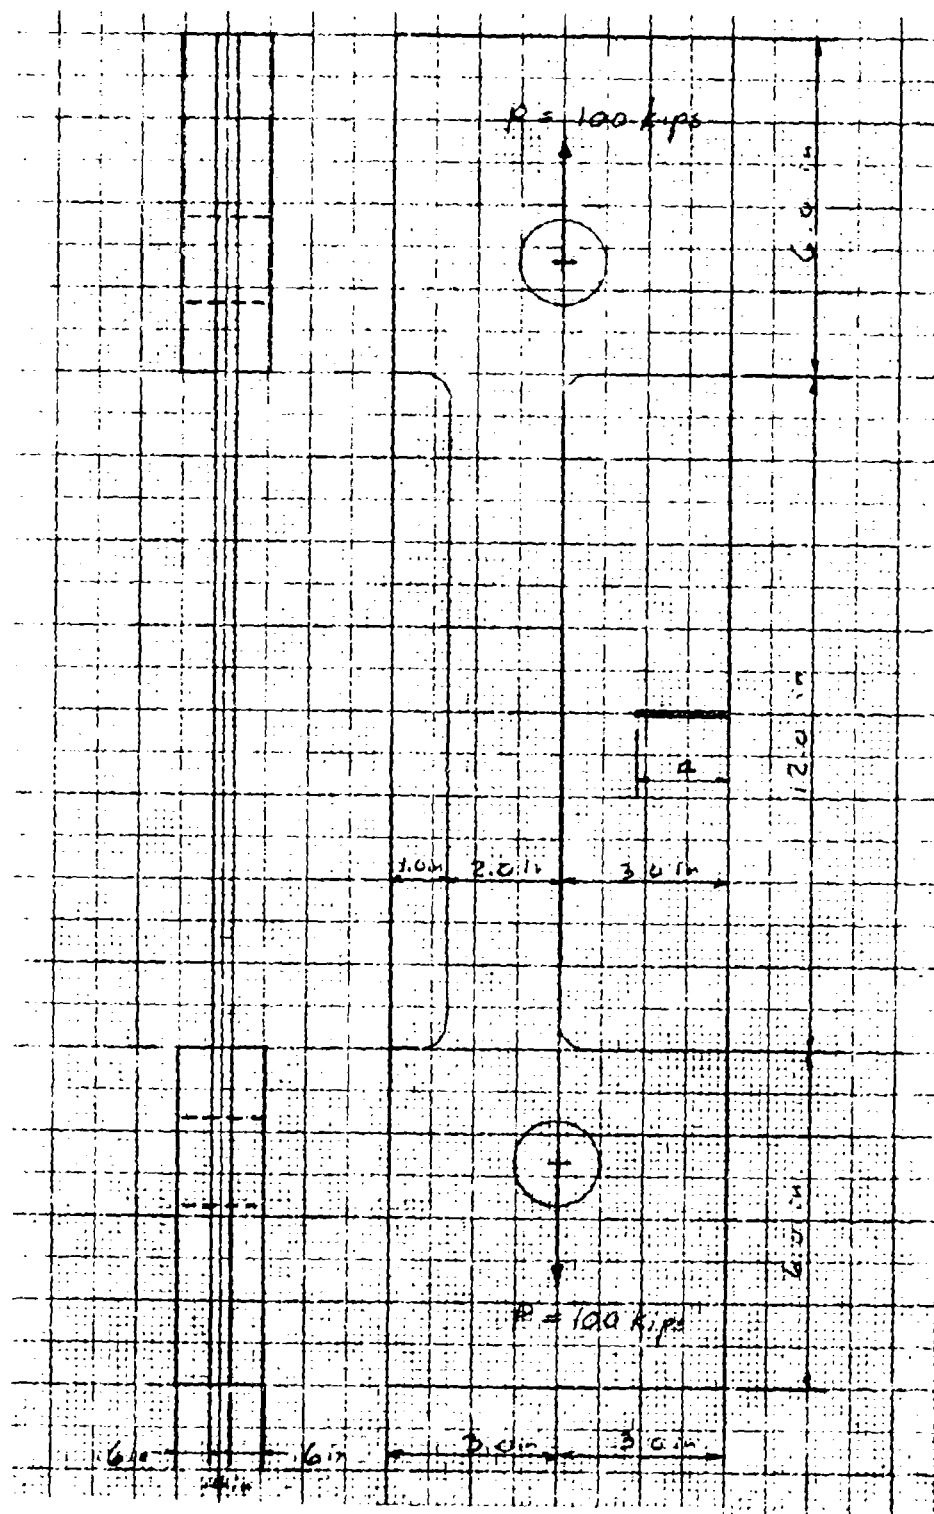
DAMAGE TOLERANCE TEST SPECIMEN
